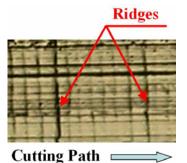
Micrograph of Workpiece during 6~8 sec (SSCS being Engaged)
